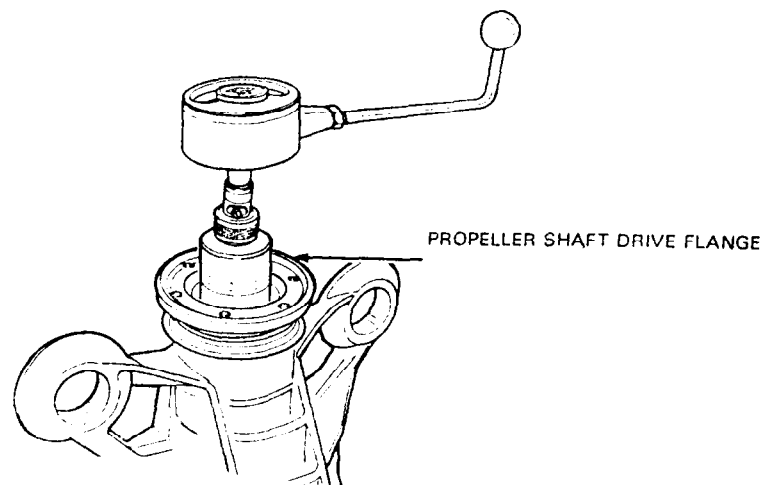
Installation of Propeller Shaft Drive Flange Oil Seals
